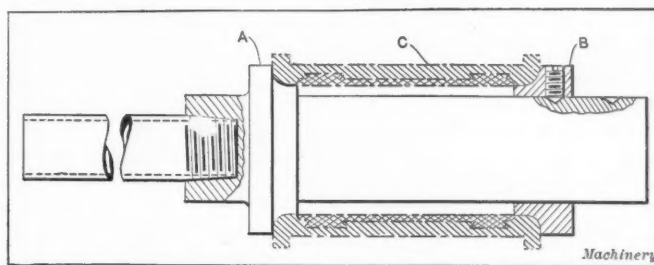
Adjustable Mandrel for babbitting Plain Half Bearings
